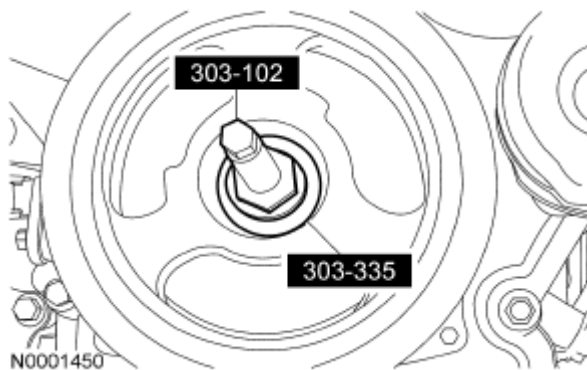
Identifying Special Tool And Crankshaft Pulley
